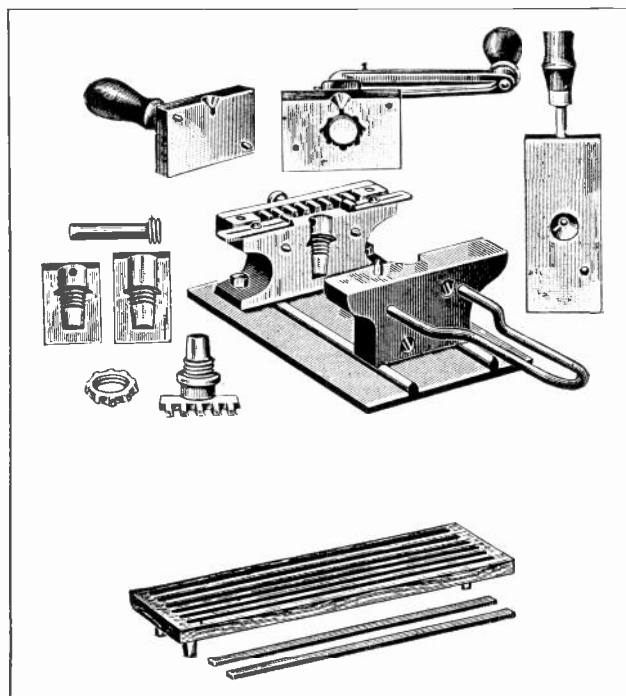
Above is shown a combination mold used for casting threaded type posts and nuts, while below is a simple mold used for casting plain lead bars to be used in filling lugs when burning on connections.
